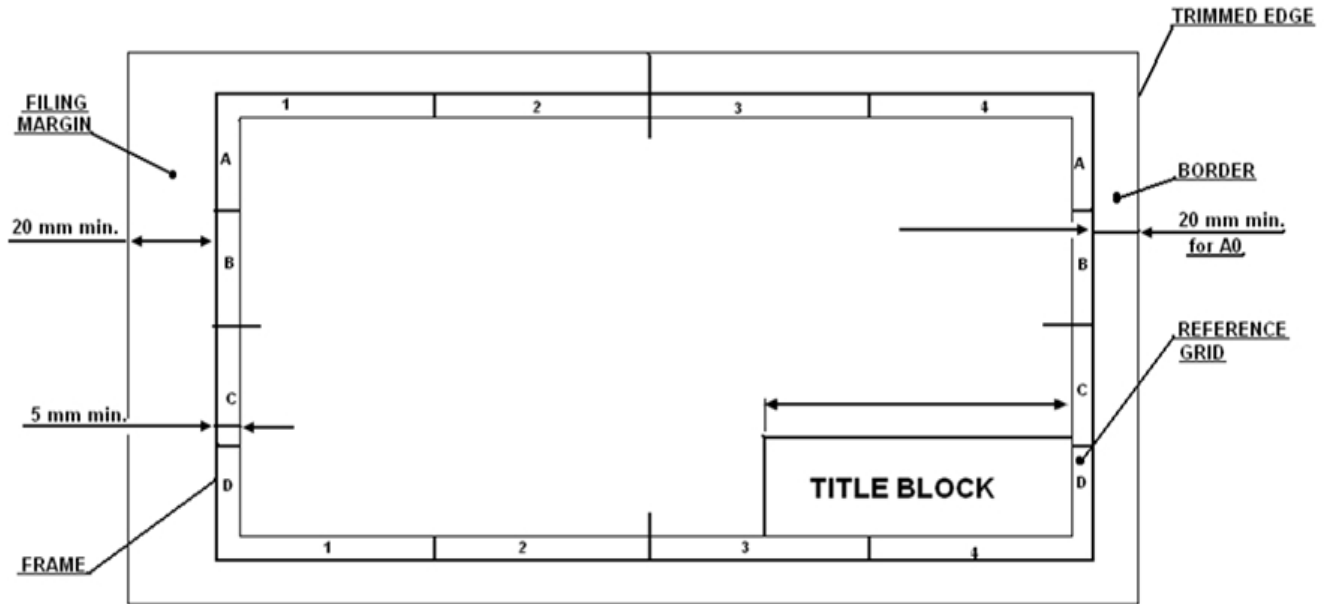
Typical drawing layout showing the margins, location of title block and grids.
